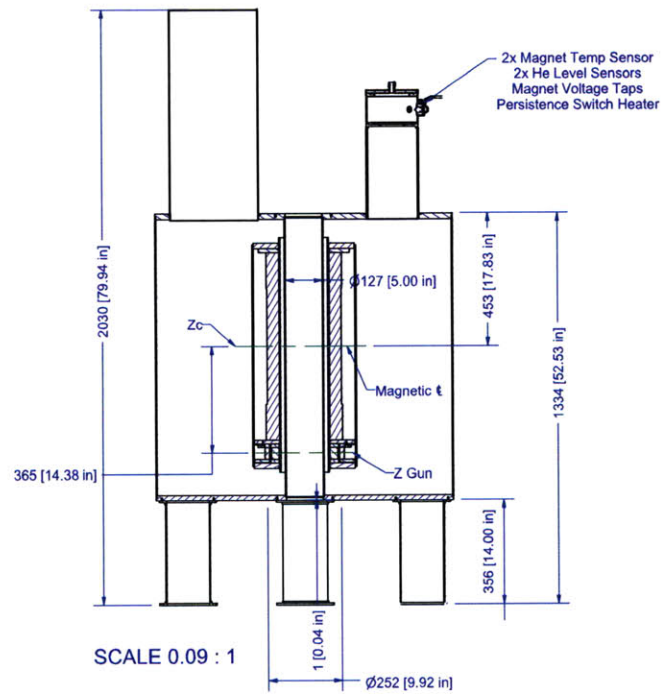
Cross sectional CAD drawing of 9.6 T magnet.
